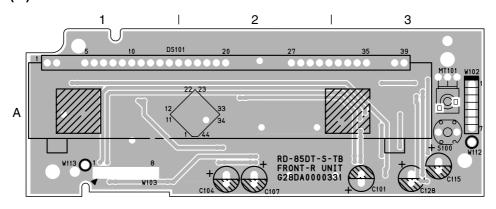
EU03A Front (R) PC Board (Top side)
